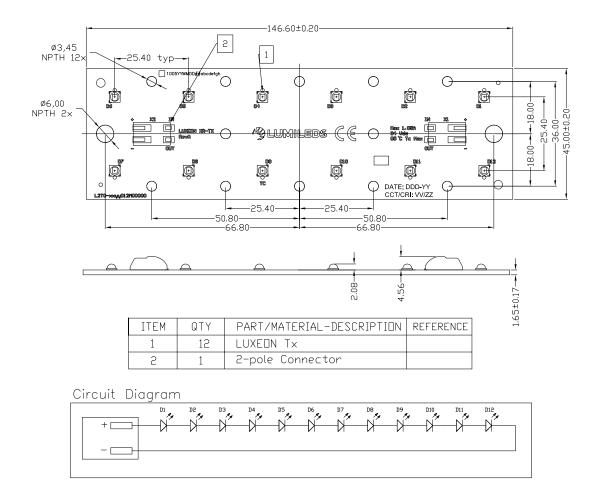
Mechanical dimensions for L2T0-xxxx012M00000.
